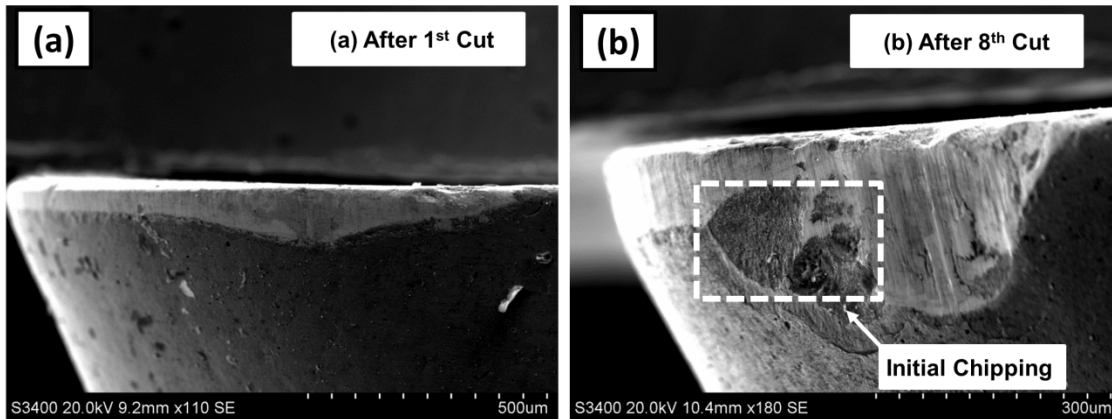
Progress of the tool flank wear from the (a) 1st cut to (b) 8th cut
